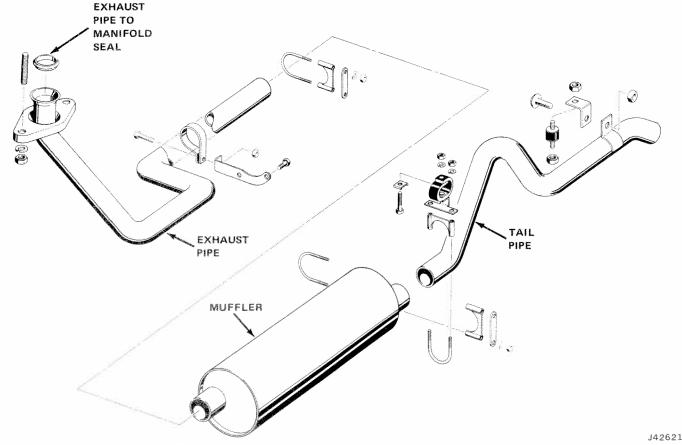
Exhaust System - Wagoneer, Cherokee, Truck - 6 Cylinder Engine
